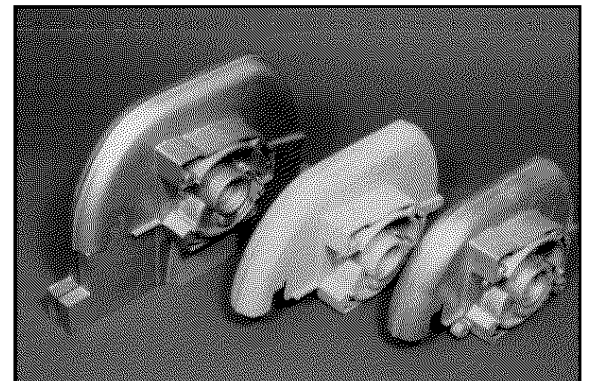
The aluminum die casting at right was first prototyped as the plaster-molded aluminum casting in the center. The original pattern used to create the intermediate plaster mold tool is on the left.
